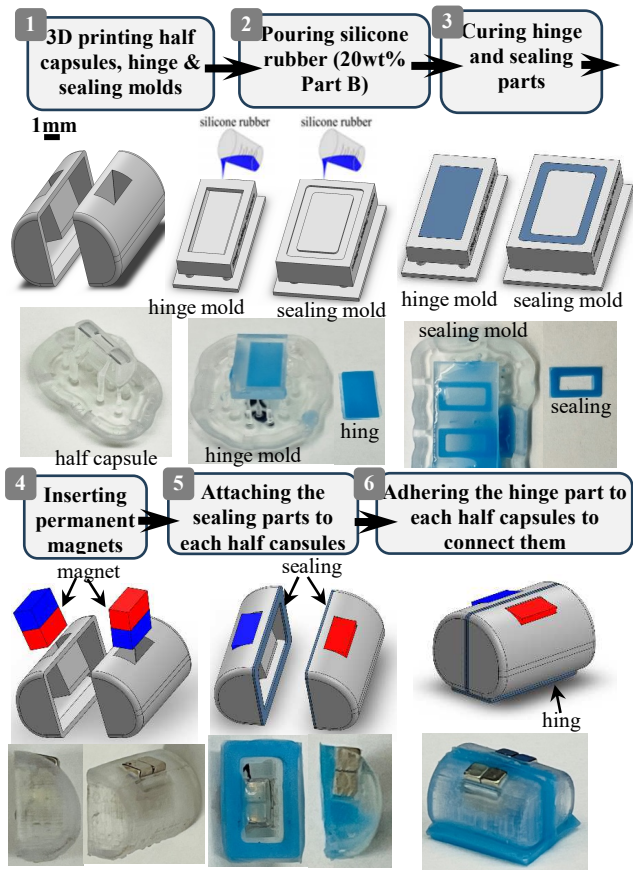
Schematic and photographs of the fabrication process and assembly steps. (1) Development of half capsules and molding structures. (2) Pouring silicone rubber (20 wt% Part B). (3) Curing the sealing and hinge components. (4) Installation of internal magnets. (5) Attaching the rectangular ring seal to each half of the capsule. (6) Adhering the hinge component to connect the two halves of the capsule.
